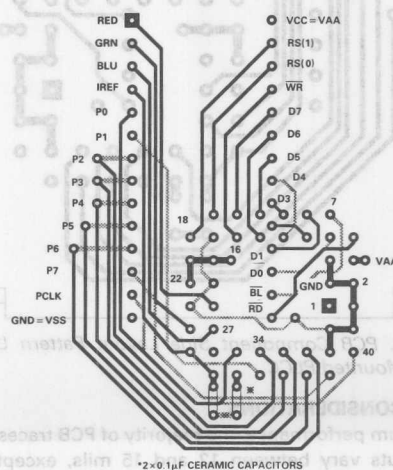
X-Ray View of Layout Using Socket Mounted PLCC
